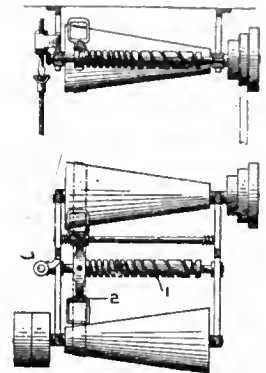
COUNTERSHAFT FOR CUTTING-OFF MACHINE TO GIVE CONSTANT CUTTING SPEED.
